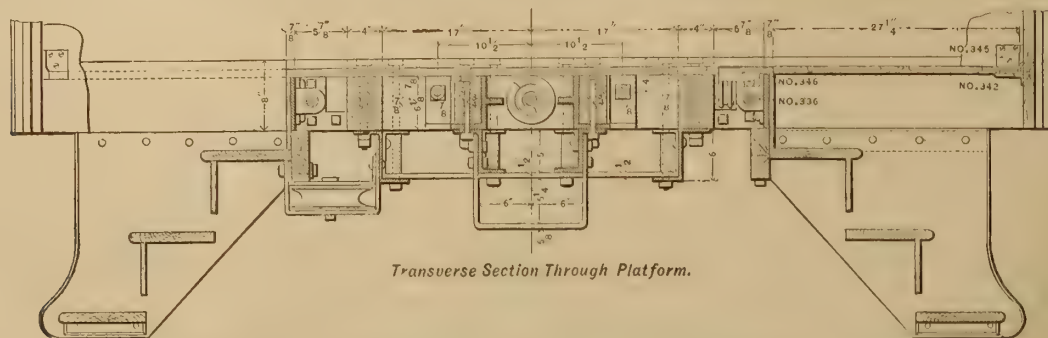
SECTION, GOULD WIDE VESTIBULE PLATFORM AND DRAFT GEAR.
